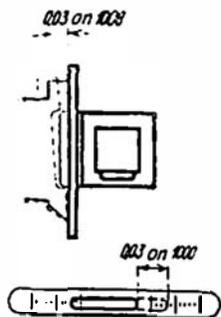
A. Tolerances in Testing a Surface for Flatness
